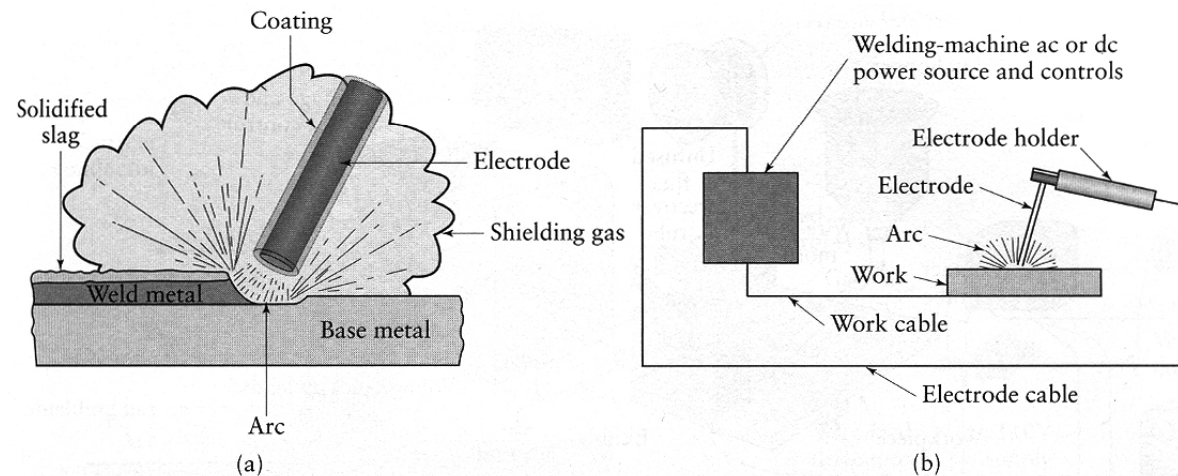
(a) Schematic illustration of the shielded metal-arc-welding process. About 50% of all large-scale industrial welding operations use this process. (b) Schematic illustration of the shielded metal-arc-welding operation, also known as *stick welding*, because the electrode is in the shape of a stick.
